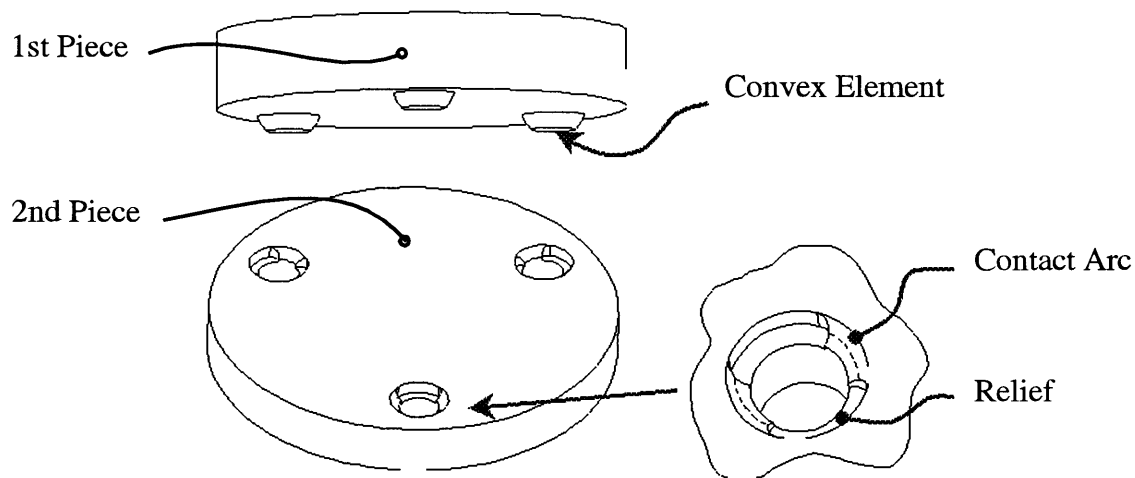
Mold Halves With Flexural Kinematic Coupling Elements
